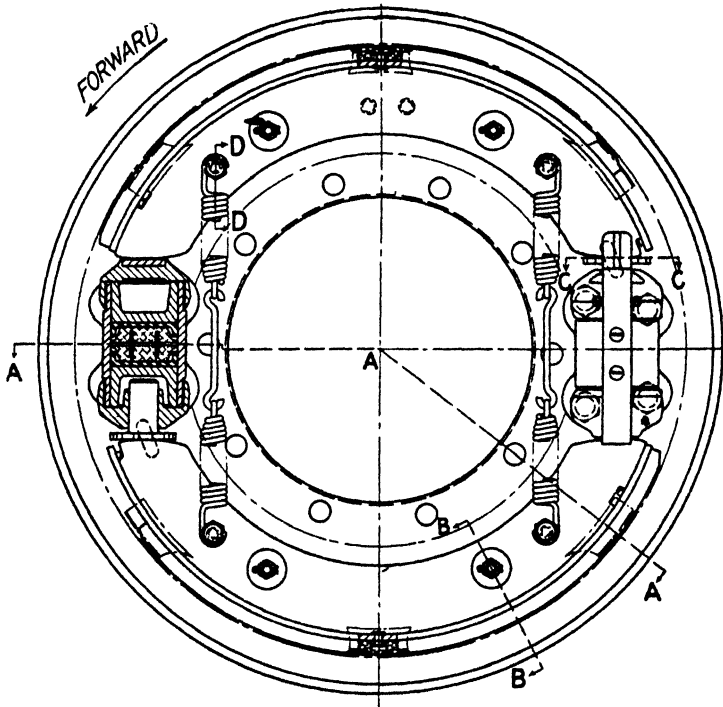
BENDIX TWINPLEX BALANCED BRAKE.
